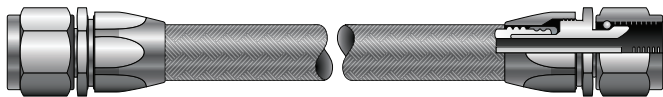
A braided stainless steel exterior fuel line with fittings.
